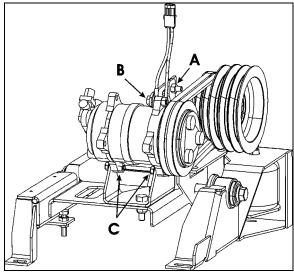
COMPRESSOR REMOVAL/ INSTALLATION
